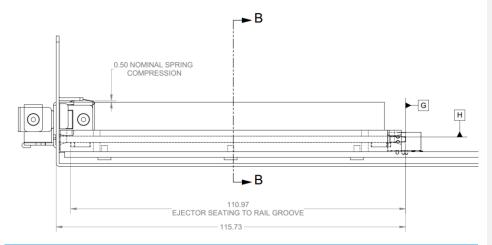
Small Form Factor Baseboard Chassis to Ejector lever Card CTF Dimensions (Side View)
